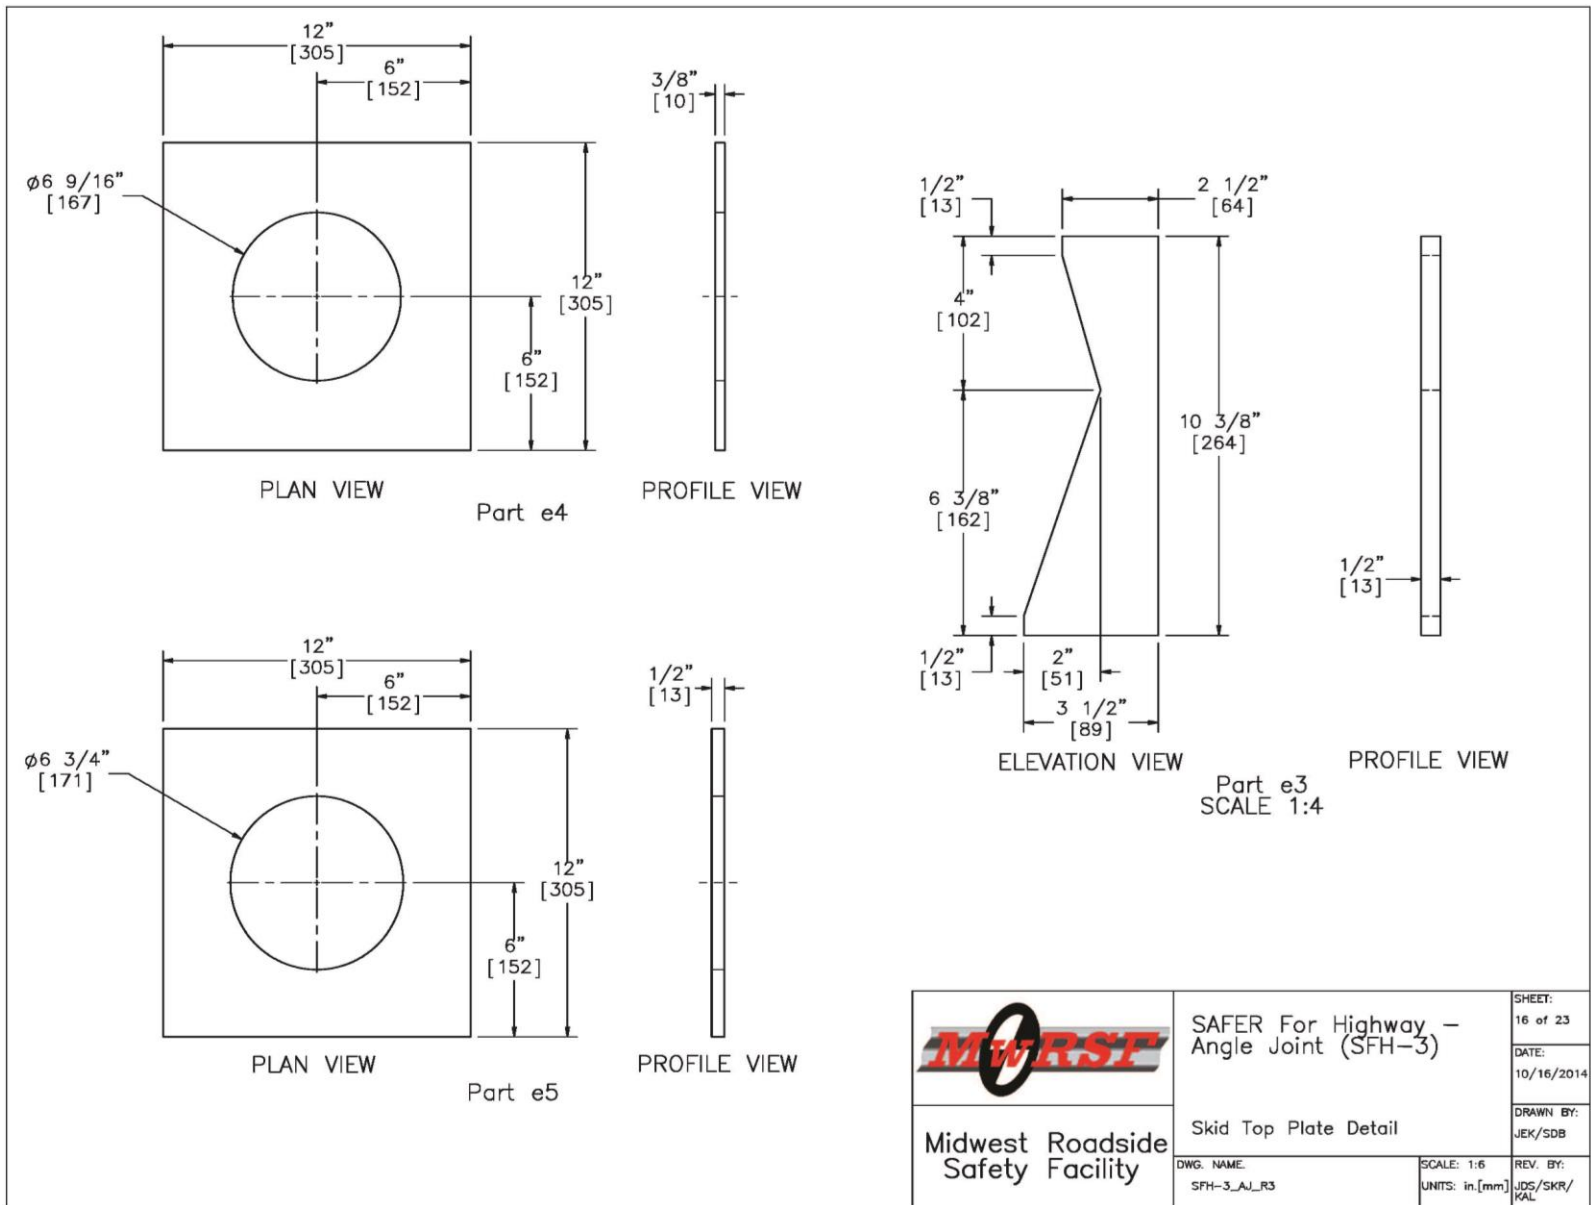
Skid Top Plate Detail, Test No. SFH-3
